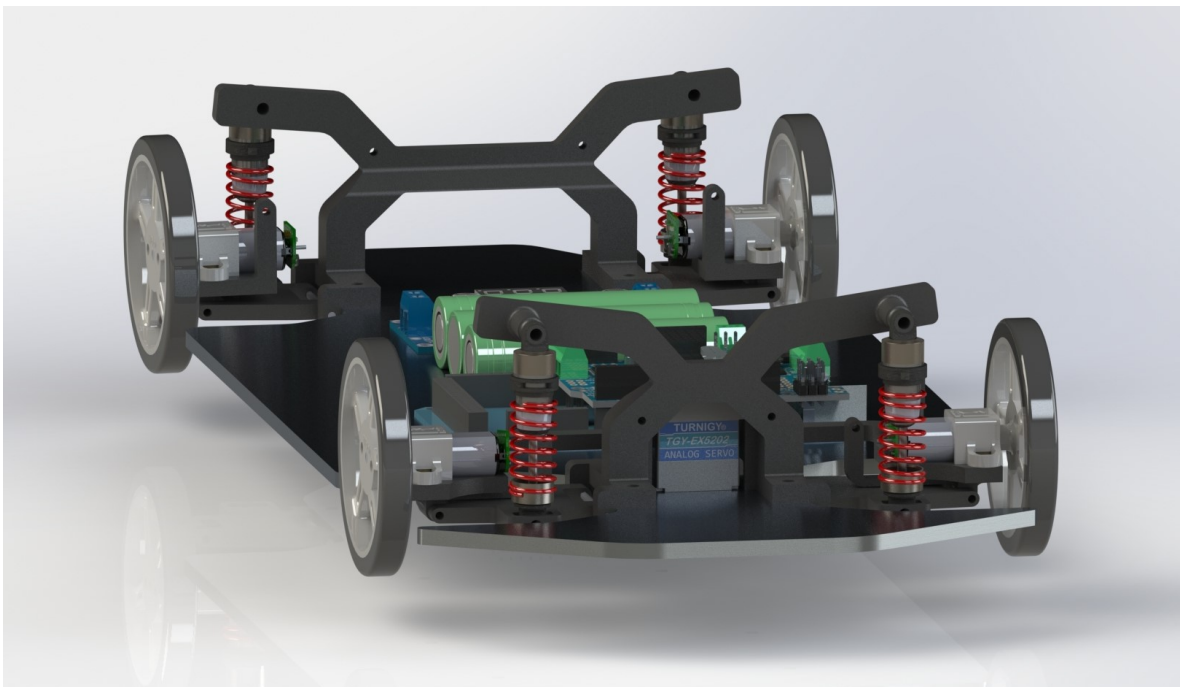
3D CAD render of the scale model assembly made in *Solidworks*.
